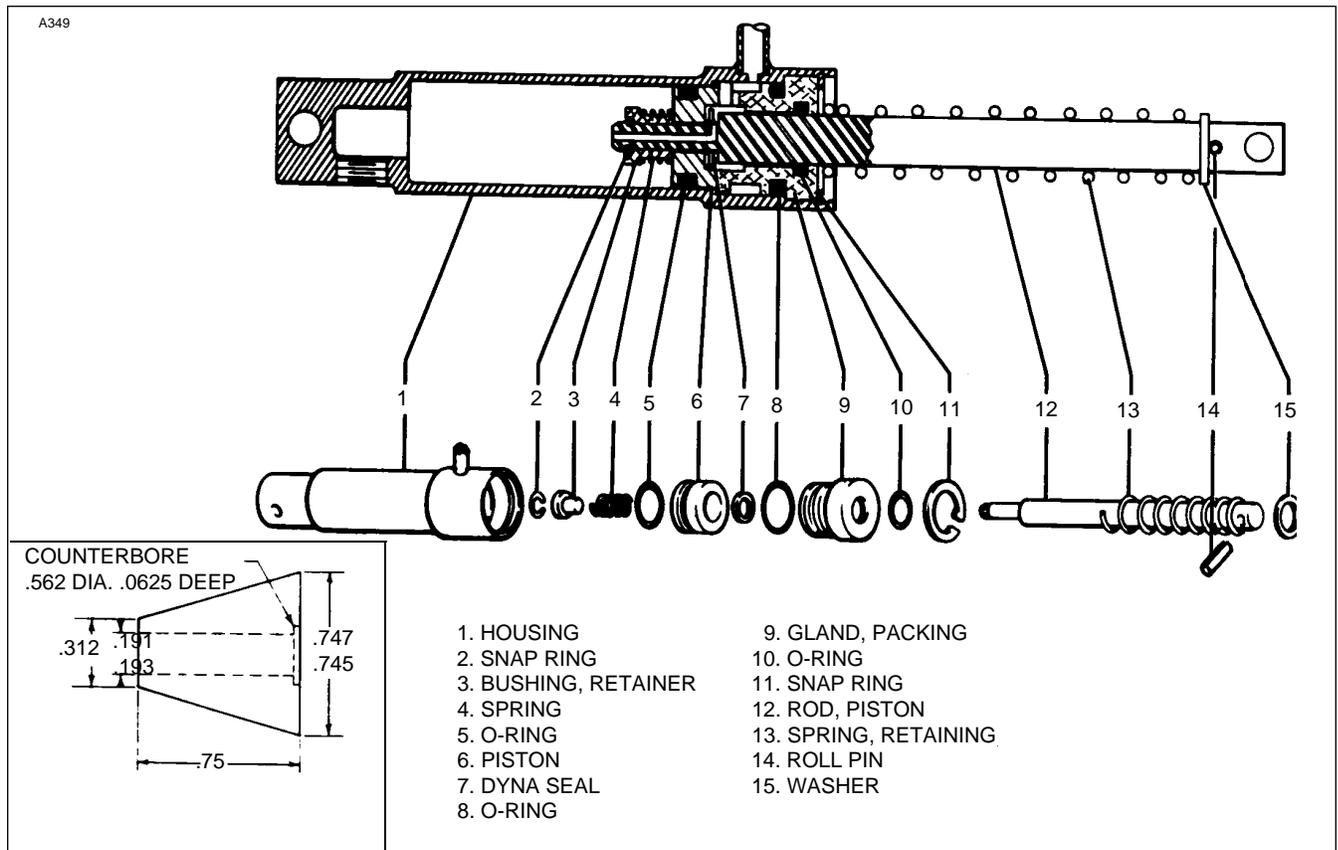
Brake Master Cylinder (Hand/Parking Brake)
